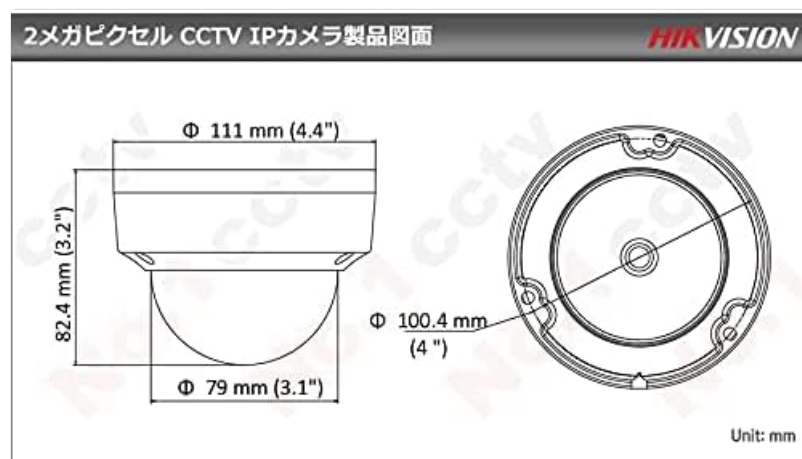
Detailed dimensions of the Hikvision DS-2CD1123G0E-I camera in millimeters and inches.
